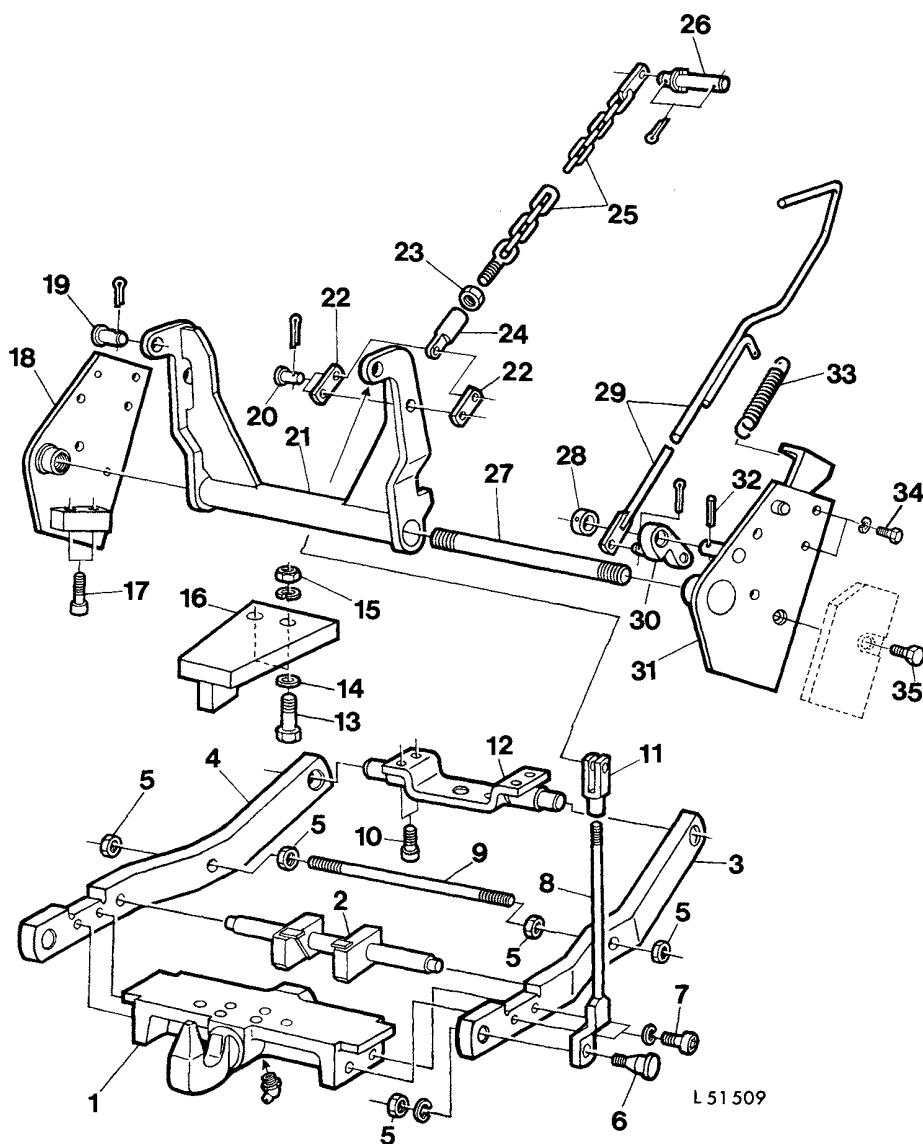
Exploded View of Hydraulic Trailer Hitch
